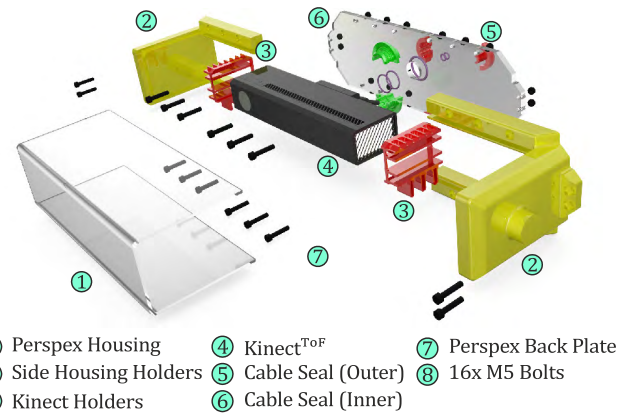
Exploded view of the 3D printed waterproof housing assembly and Perspex for Kinect^{ToF}.
